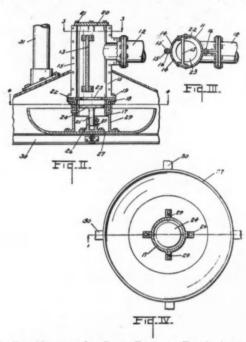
The Herrbold Old Paper Treater. Fig. 3—Attachment Showing Intake Into Paper Treater. Fig. 4— Top of Herrbold Paper Treater.
